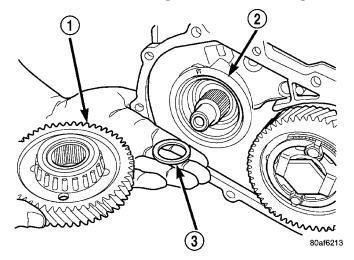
Remove Transfer Shaft Gear and (Select) Shim
